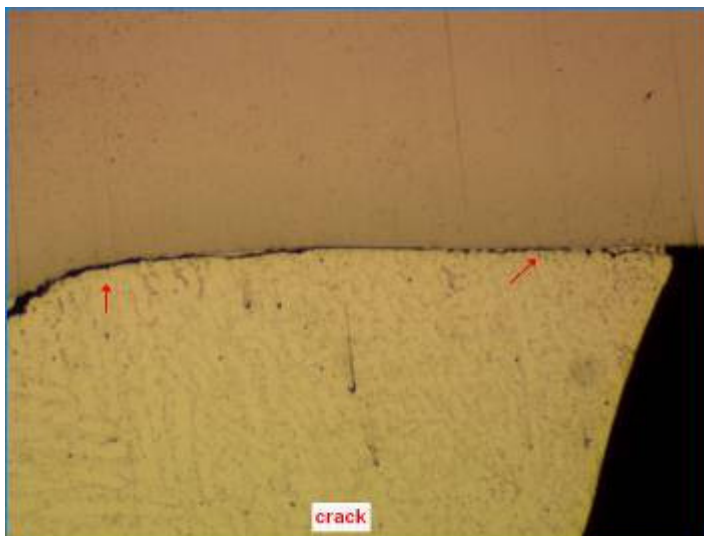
cross section, SN62, U61, left lead solder crack, 400x a
